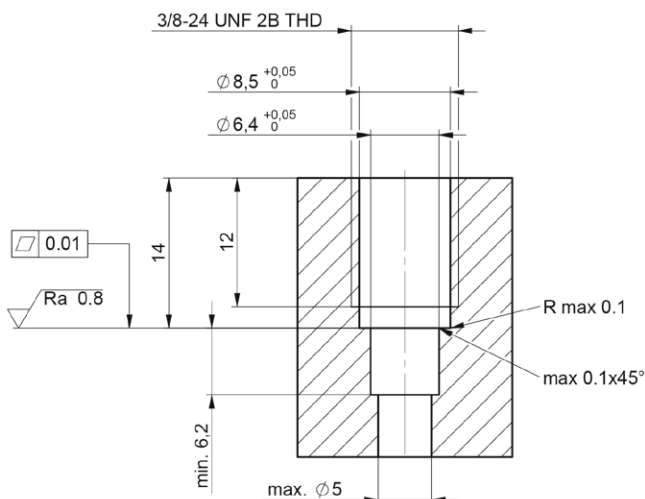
Mounting bore dimensions for recessed mounting of Type 6239ABA (3/8-24 UNF thread)
